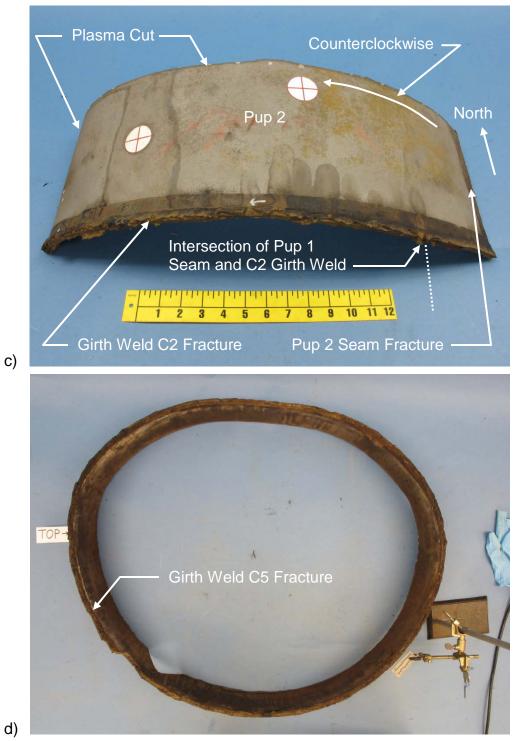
(cont.): c) Section taken from pup 2; d) Ring cut from north end of pup 4 containing girth weld C5 fracture.
